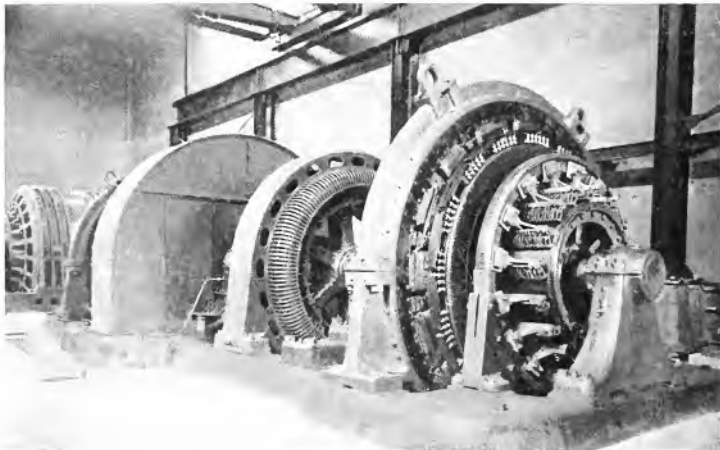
Flywheel Motor-generator Set for Blooming Mill Motor Shown in Fig. 20.
